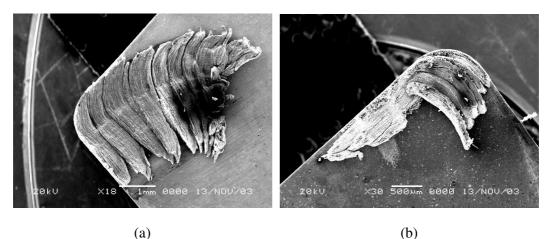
A BUE occurred on the cutting tool during the machining process at the cutting speed of 50 m/min. a) Uncoated cemented carbide, b) AlTiN coated cemented carbide.
